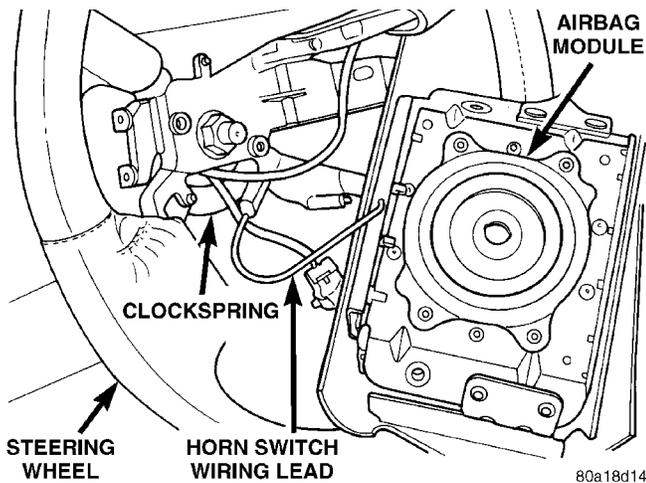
Clock Spring To Horn Switch Wiring Connection
